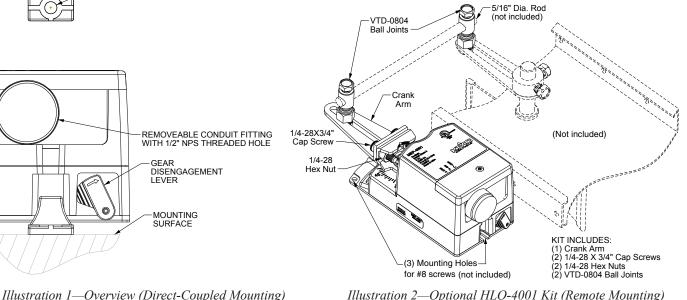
Optional HLO-4001 Kit (Remote Mounting)
